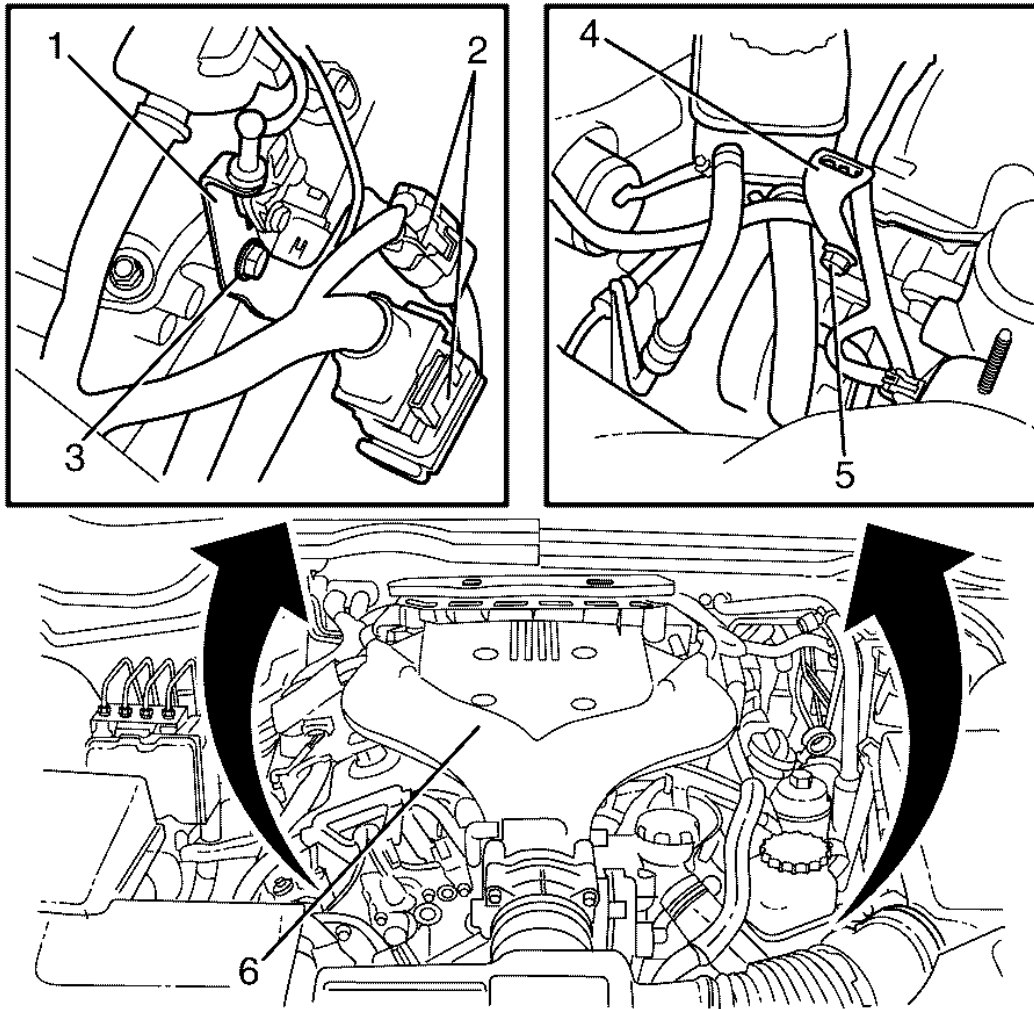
Upper Intake Manifold Sight Shield Bracket To Engine Assembly Bolt
